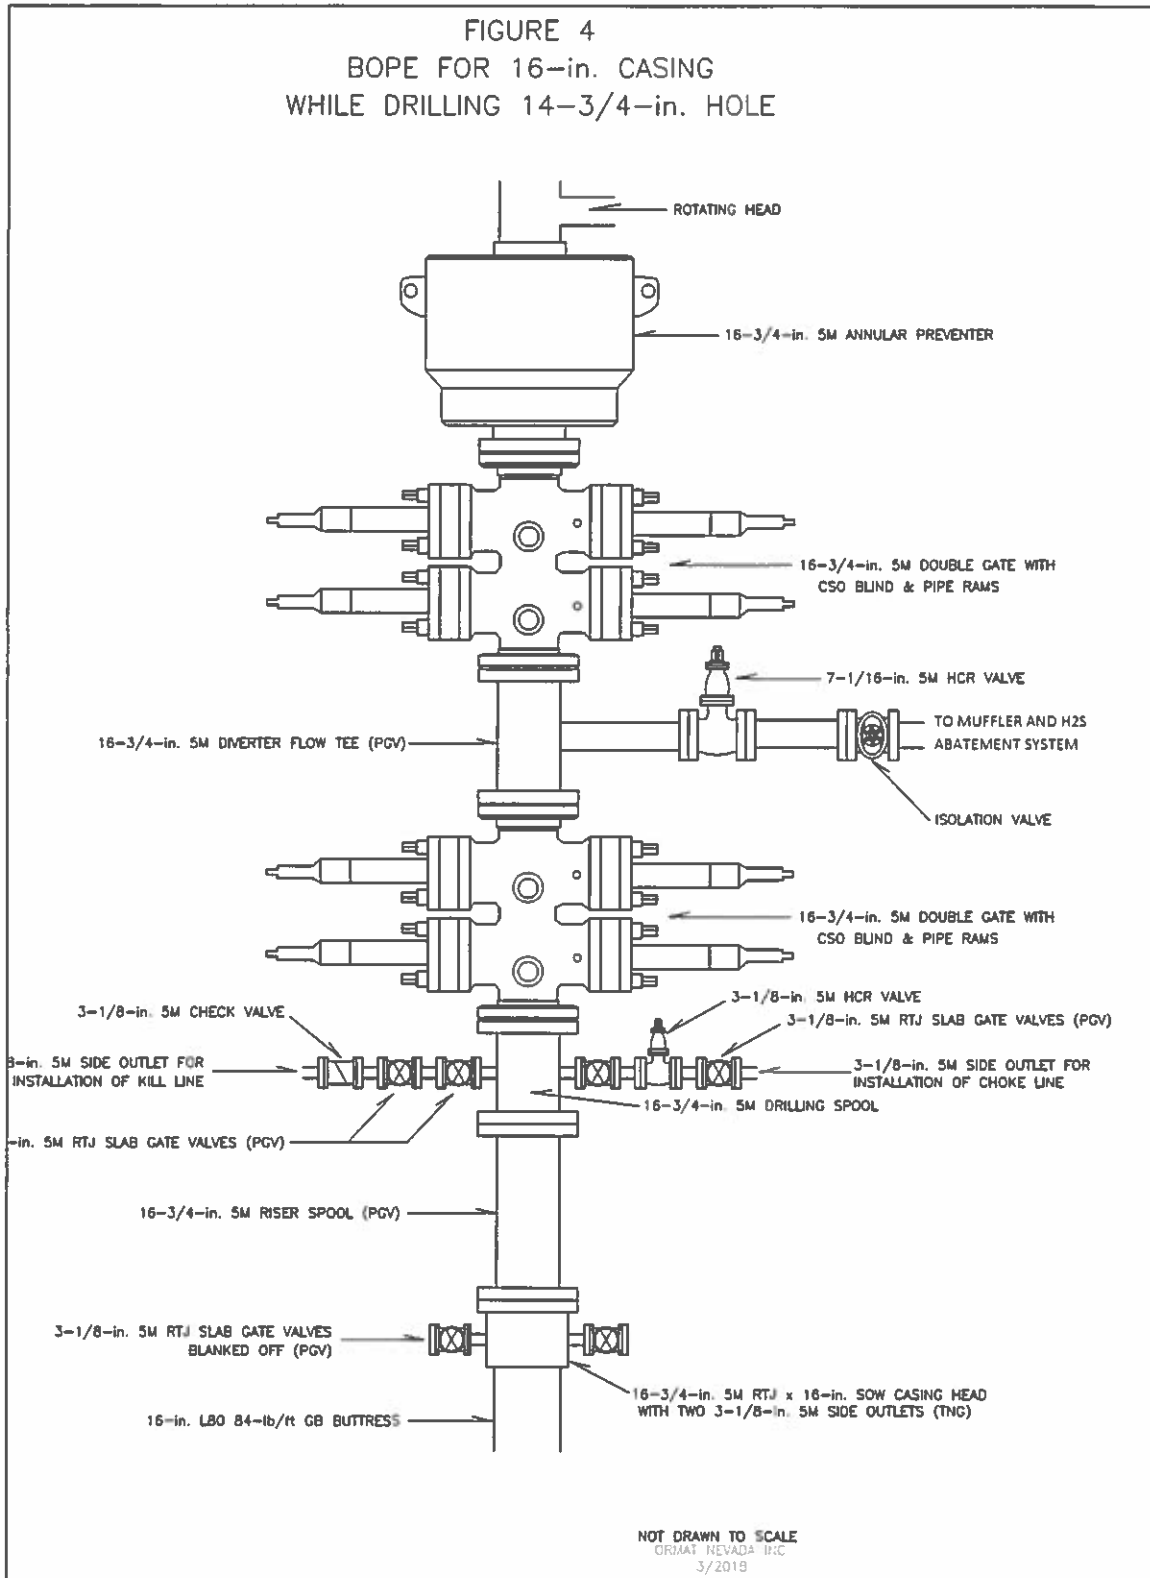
BOPE for 16-inch casing while drilling 14-3/4-inch hole.
